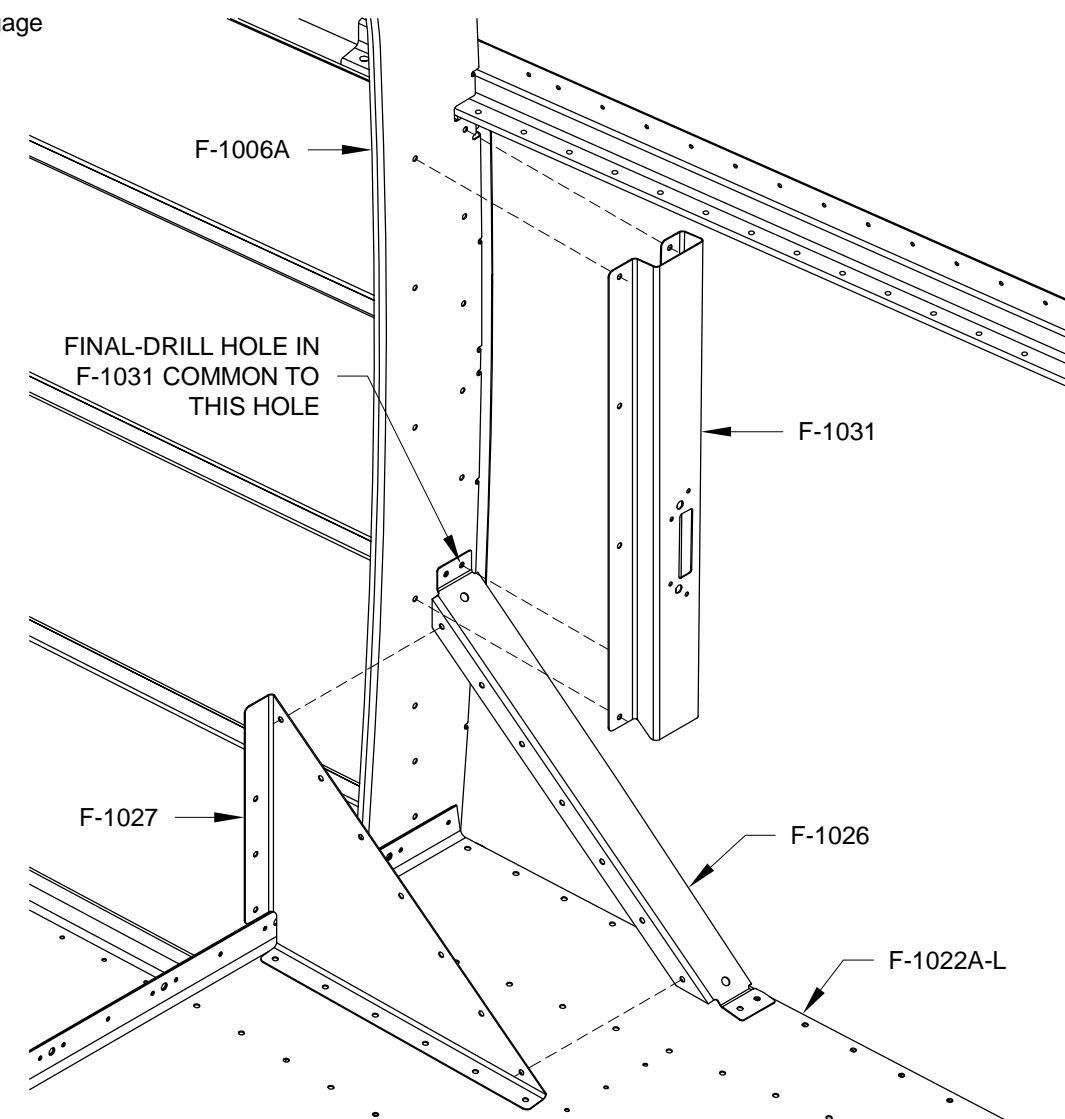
UPPER BAGGAGE DOOR SEAL CHANNEL AND CLOSE-OUT PANEL
